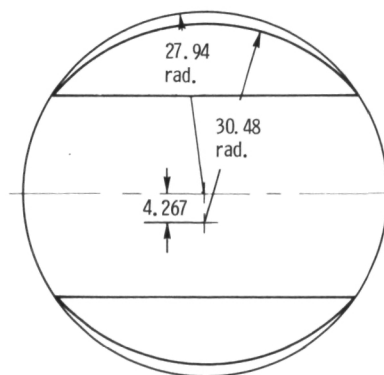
Wedge nozzle dimensions. (Dimensions are in centimeters.)
